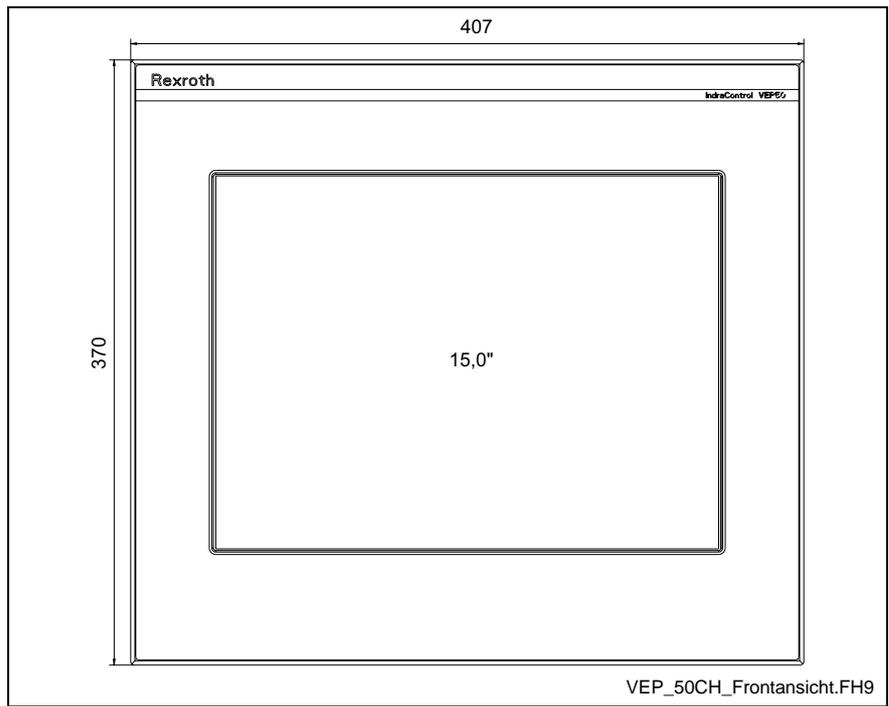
Dimensions - Front panel VEP 50.1CHU
